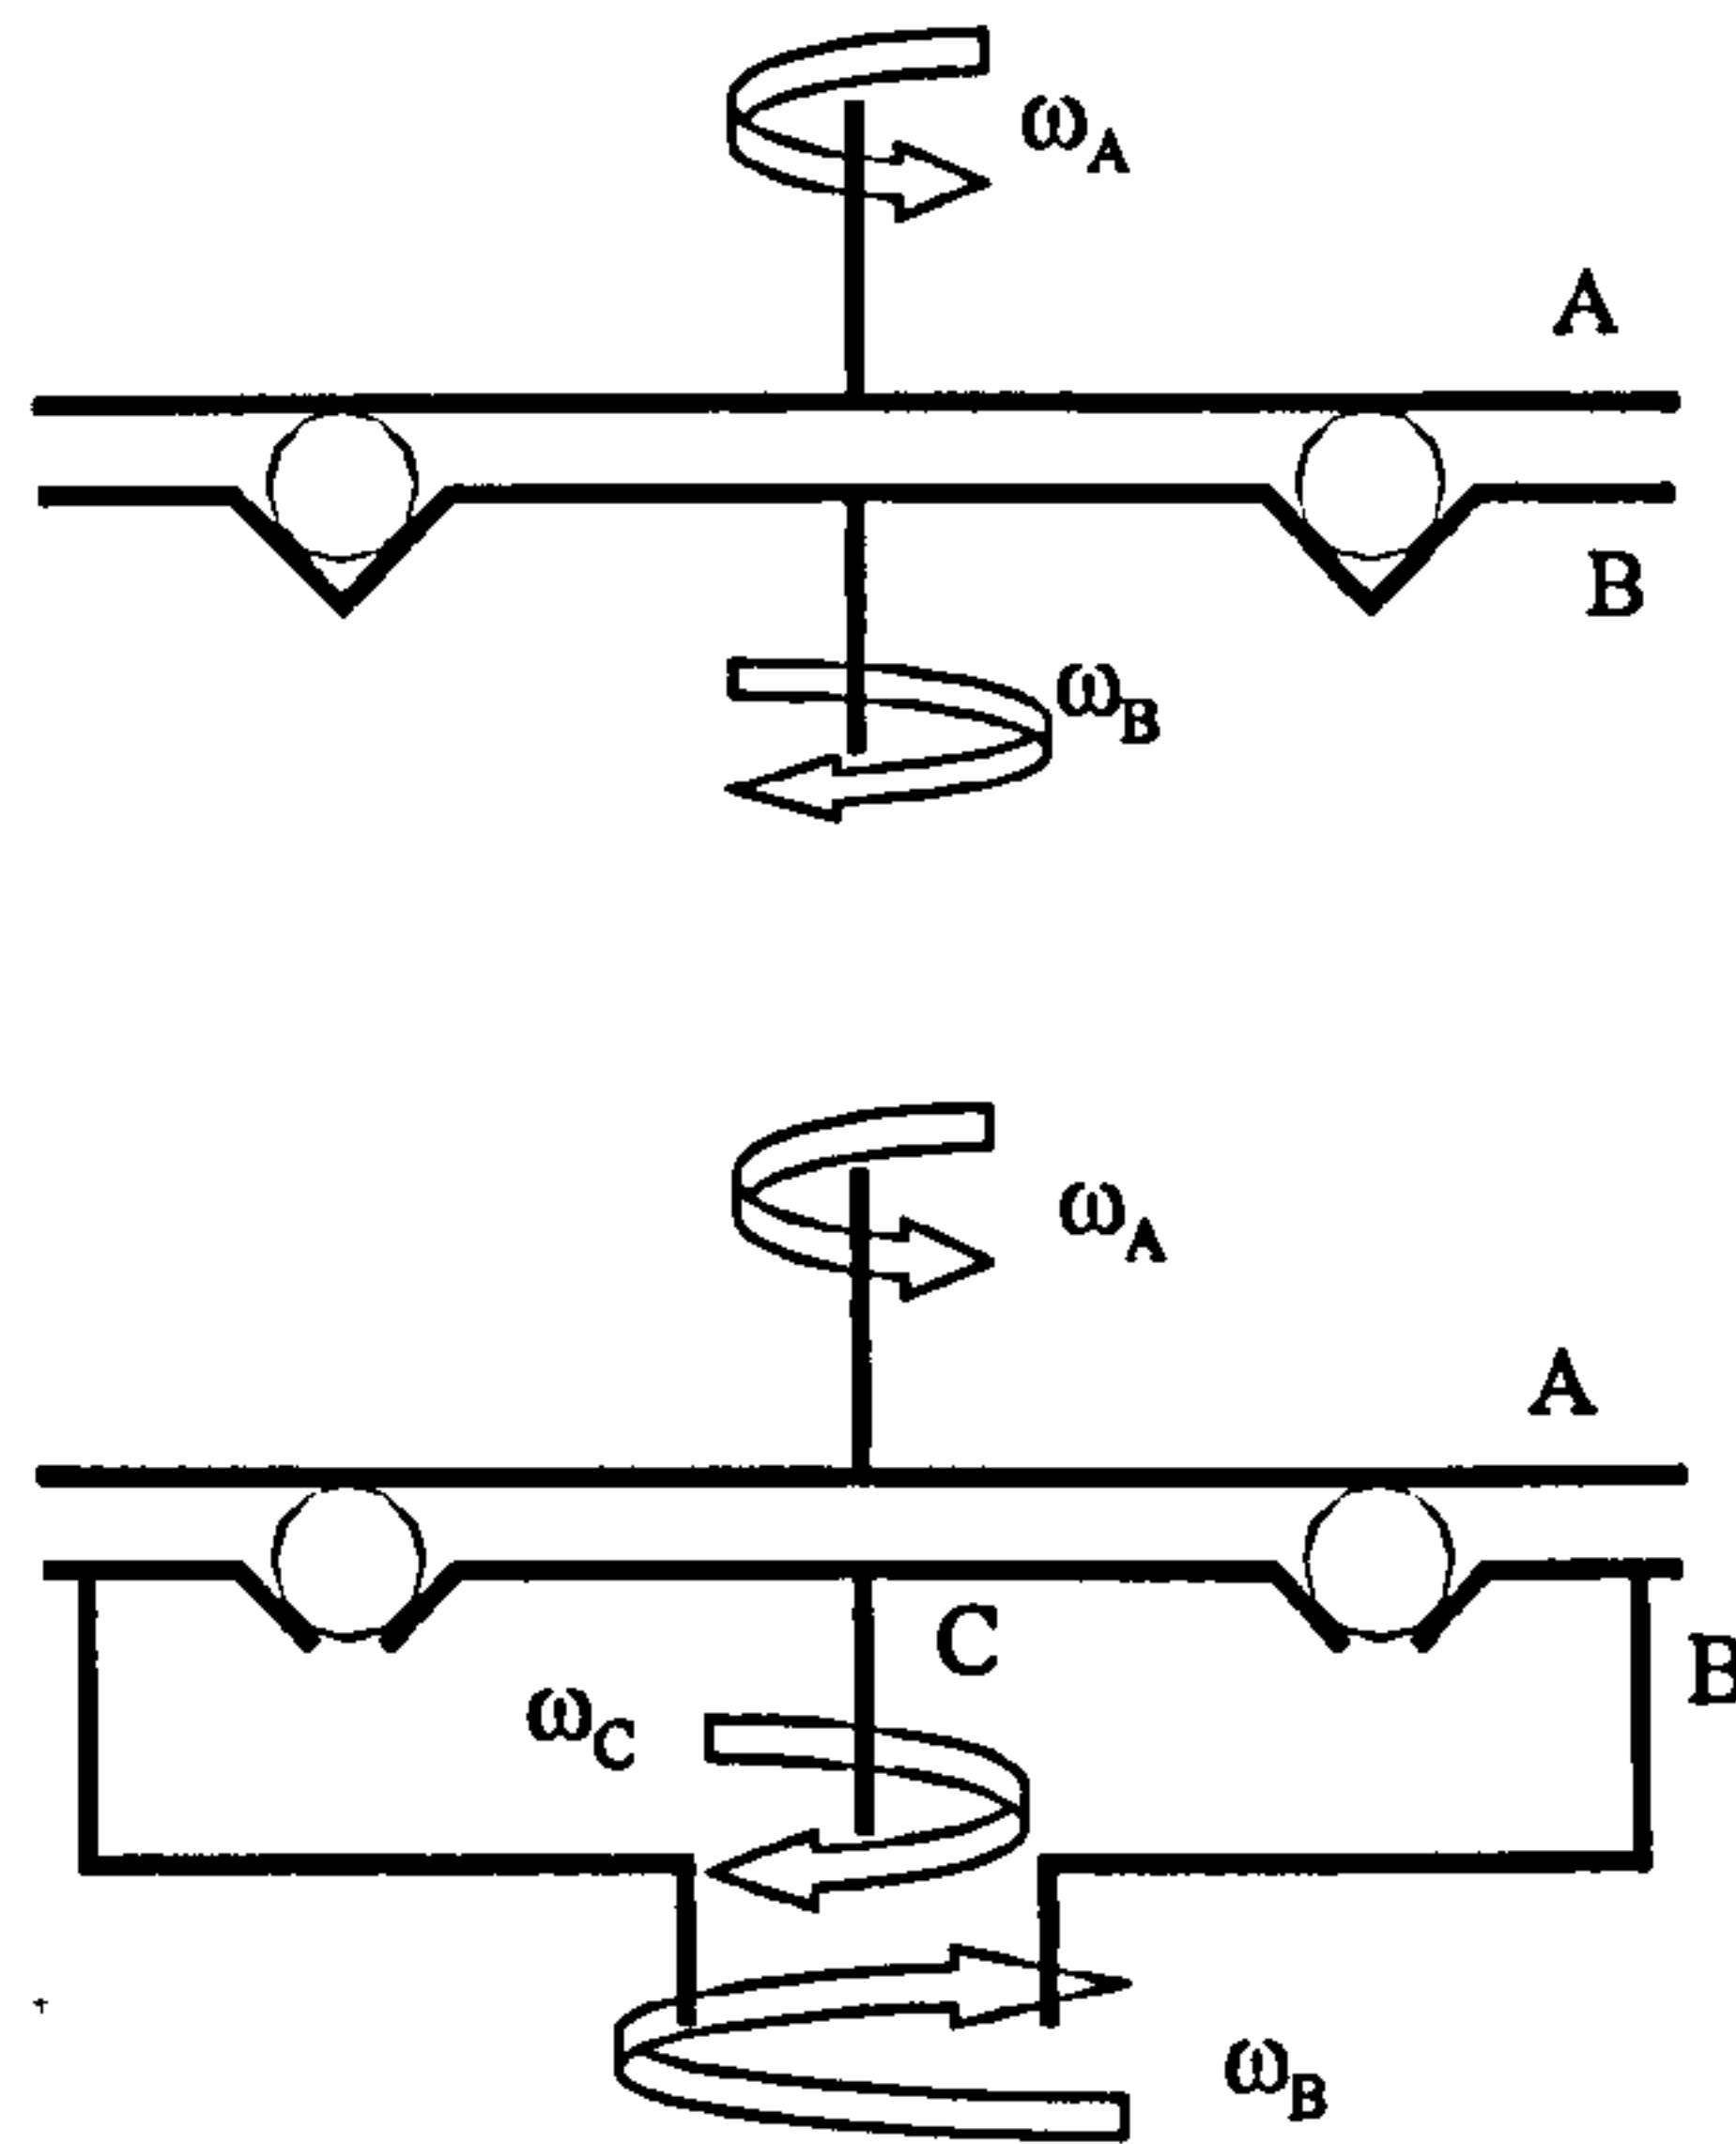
One flat surface, loading tools and carrier lapping
